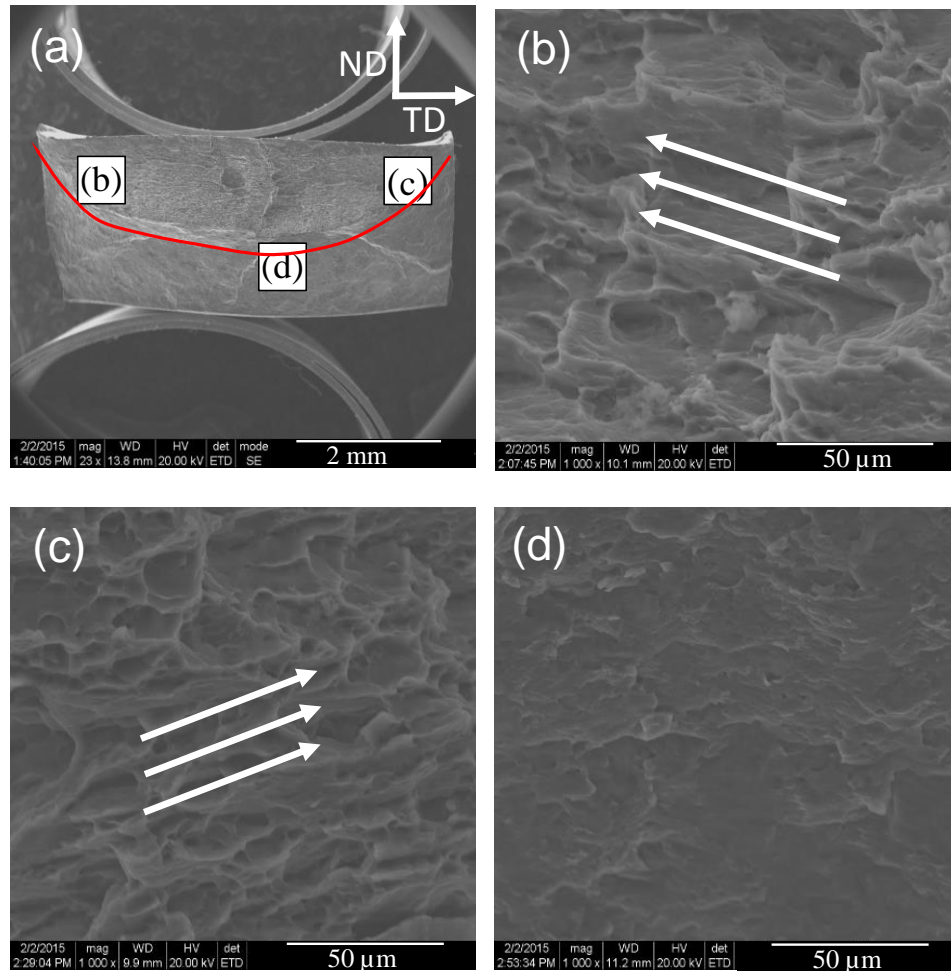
Scanning Electron Microscope fractography of specimen deformed in the welding direction. (a) low magnification. (b), (c) and (d): magnified regions.
